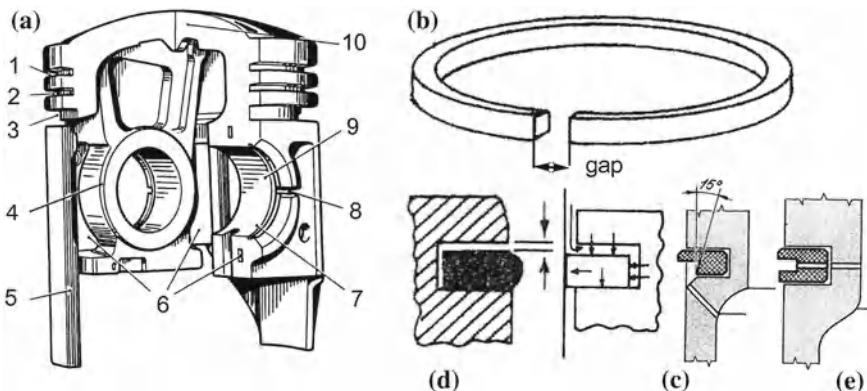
a Piston. 1, 2 and 3: grooves for the elastic rings and (4) hole for the wrist pin installation. b–e Piston ring in their grooves. c and d Radial and axial clearances to provide free ring movements. e Configuration of the oil scraper ring, with the discharge holes in the piston
